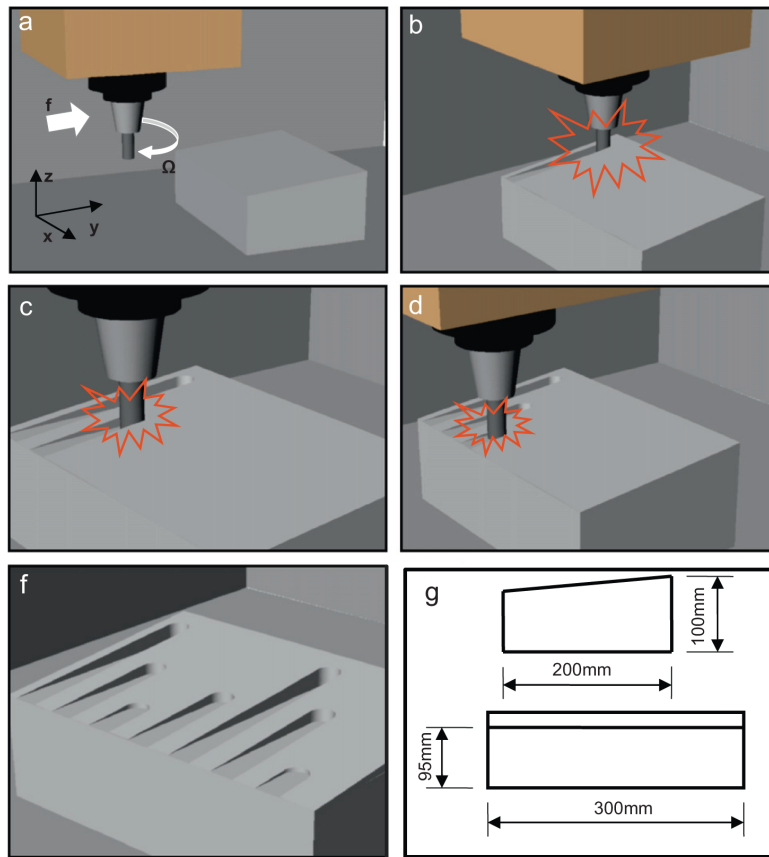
Concept of experimental generation of SLD. (a,b) Axial depth of cut increases in feed direction until chatter occurs. (c,d) Increase in spindle speed for different cutting passes. (f) SLD is physically marked on the workpiece. (g) Workpiece dimensions (Quintana et al., 2008)
